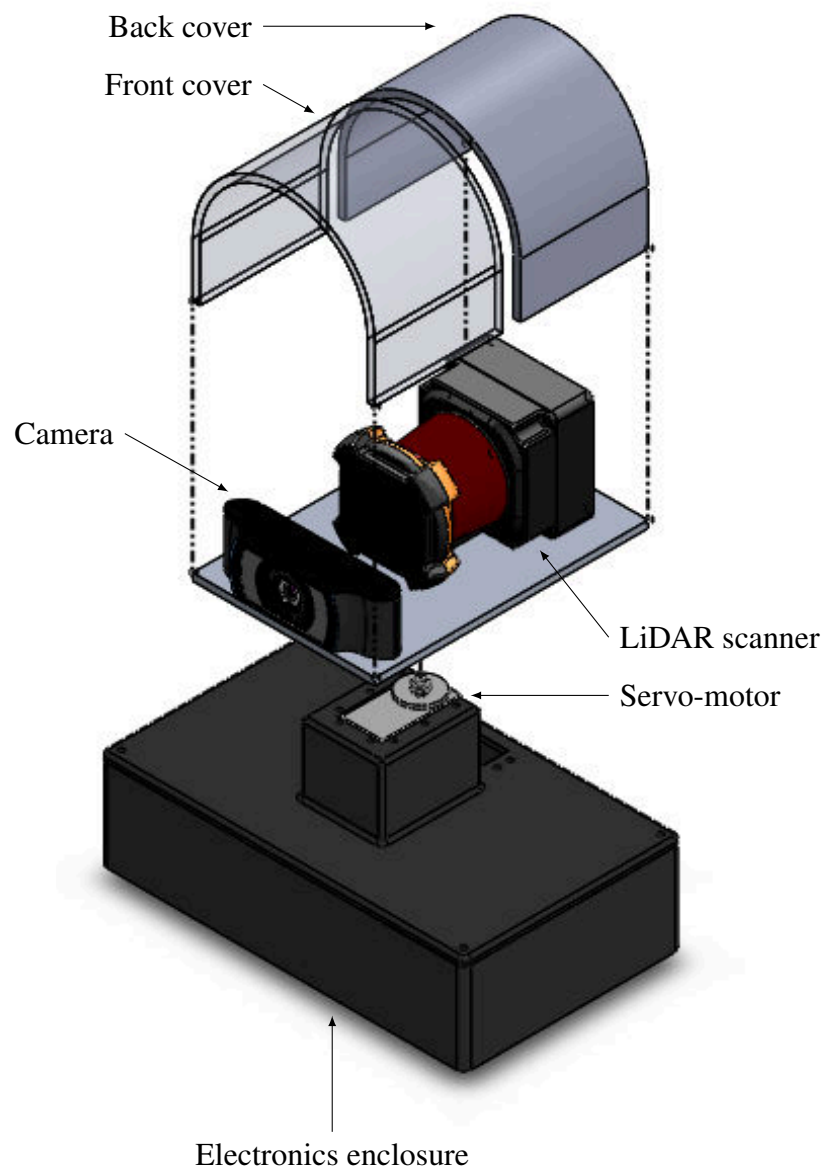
Exploded view of the apparatus, adapted from [88]
